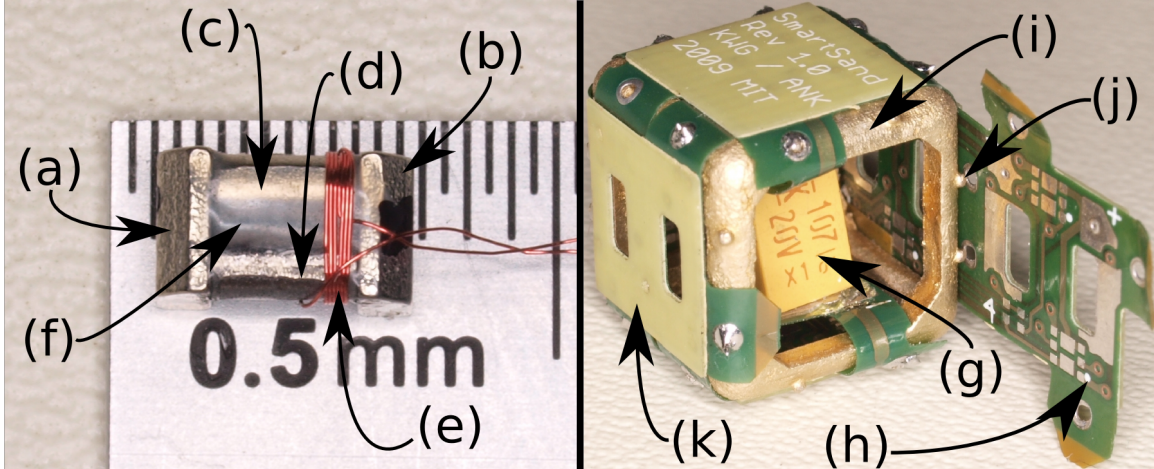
Partially disassembled view of a pebble. (Left) The electropermanent magnet connector, with most of the coil removed to show the permanent magnet rods. (Right) A pebble opened to show the mounting of the capacitor in the center of the cube, and the mating of the frame nubs with the flex circuit holes.
